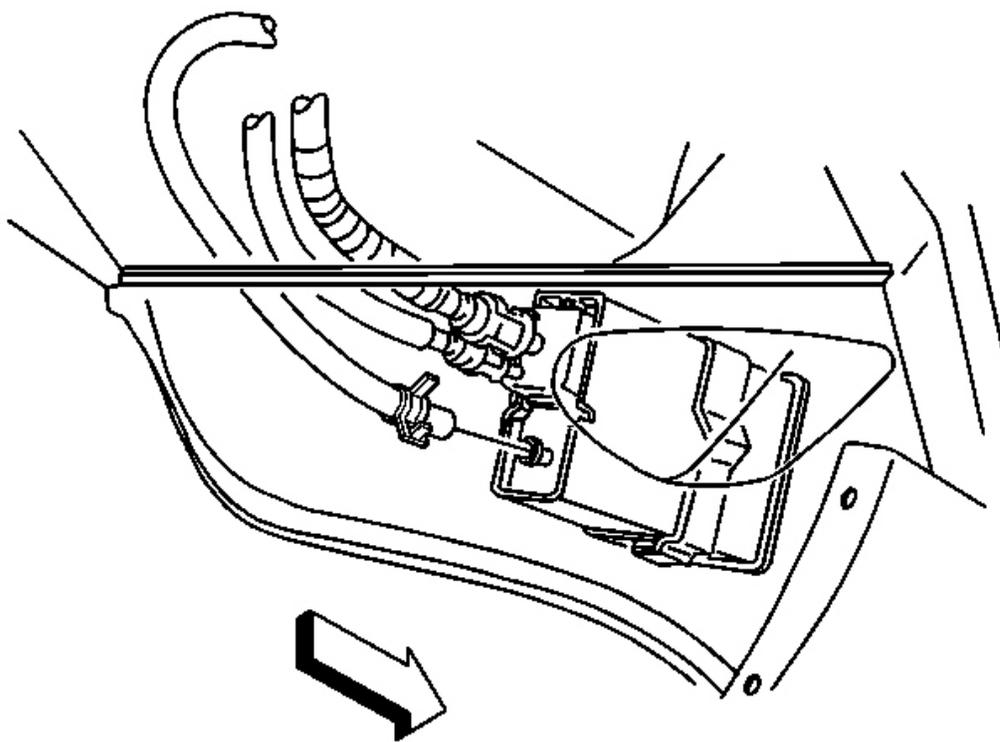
EVAP Canister Access Cover In Right Rear Wheelhouse Panel
